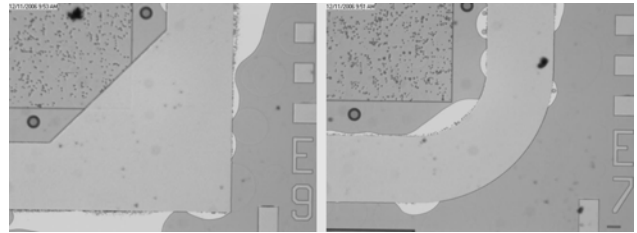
Solder “spills” after bonding wafers with TiW adhesion layer. Pictures are taken through glass substrate.
